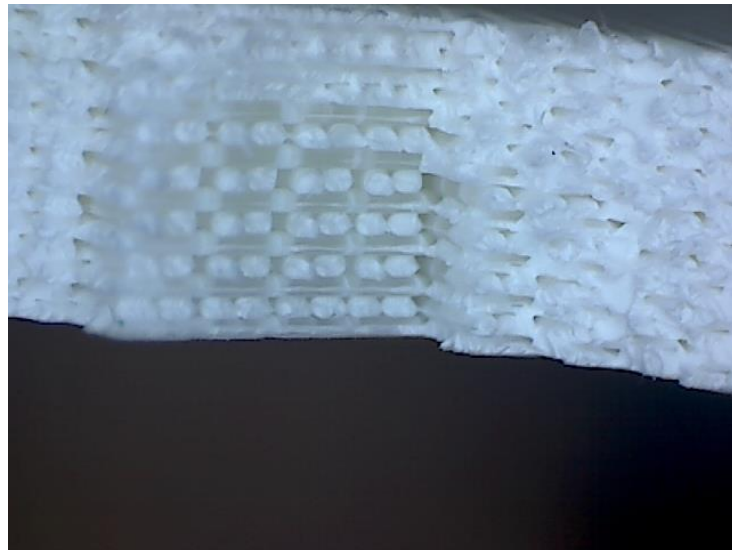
Fracture surface of a +/- 45° toolpath orientation continuous build ABS tensile specimen.
